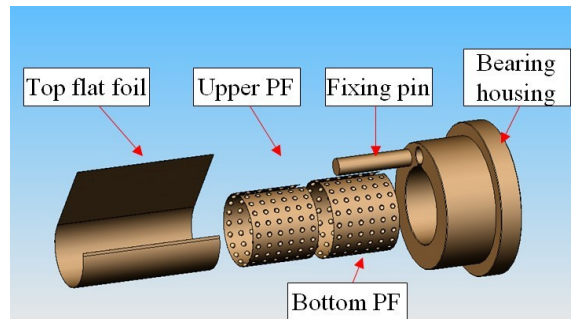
Assembly of multi-decked protuberant foil journal bearing
